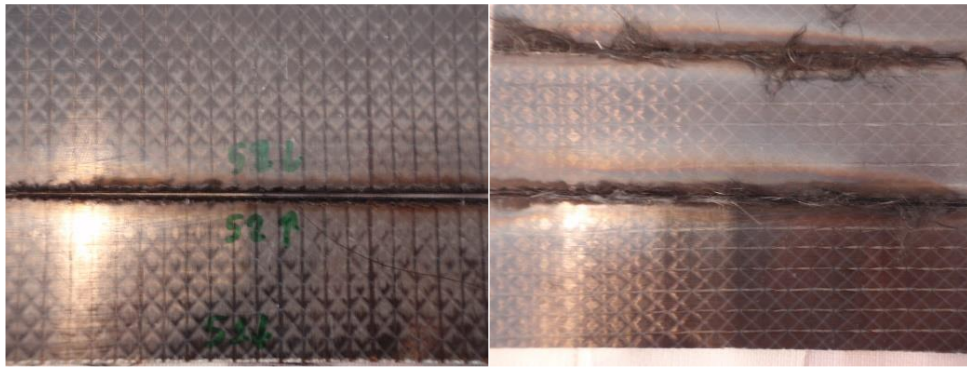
Images of top side laser cut surfaces of tests 52 (left) and 53 (right).
